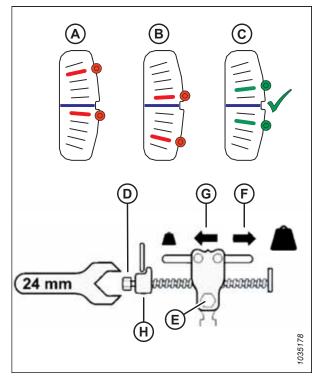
Left Wing Balance Adjustment Checker Plate
